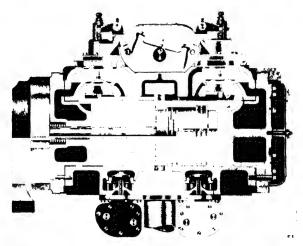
Cross-section of a small-size Skinner unaflow-engine cylinder showing piston and valves
